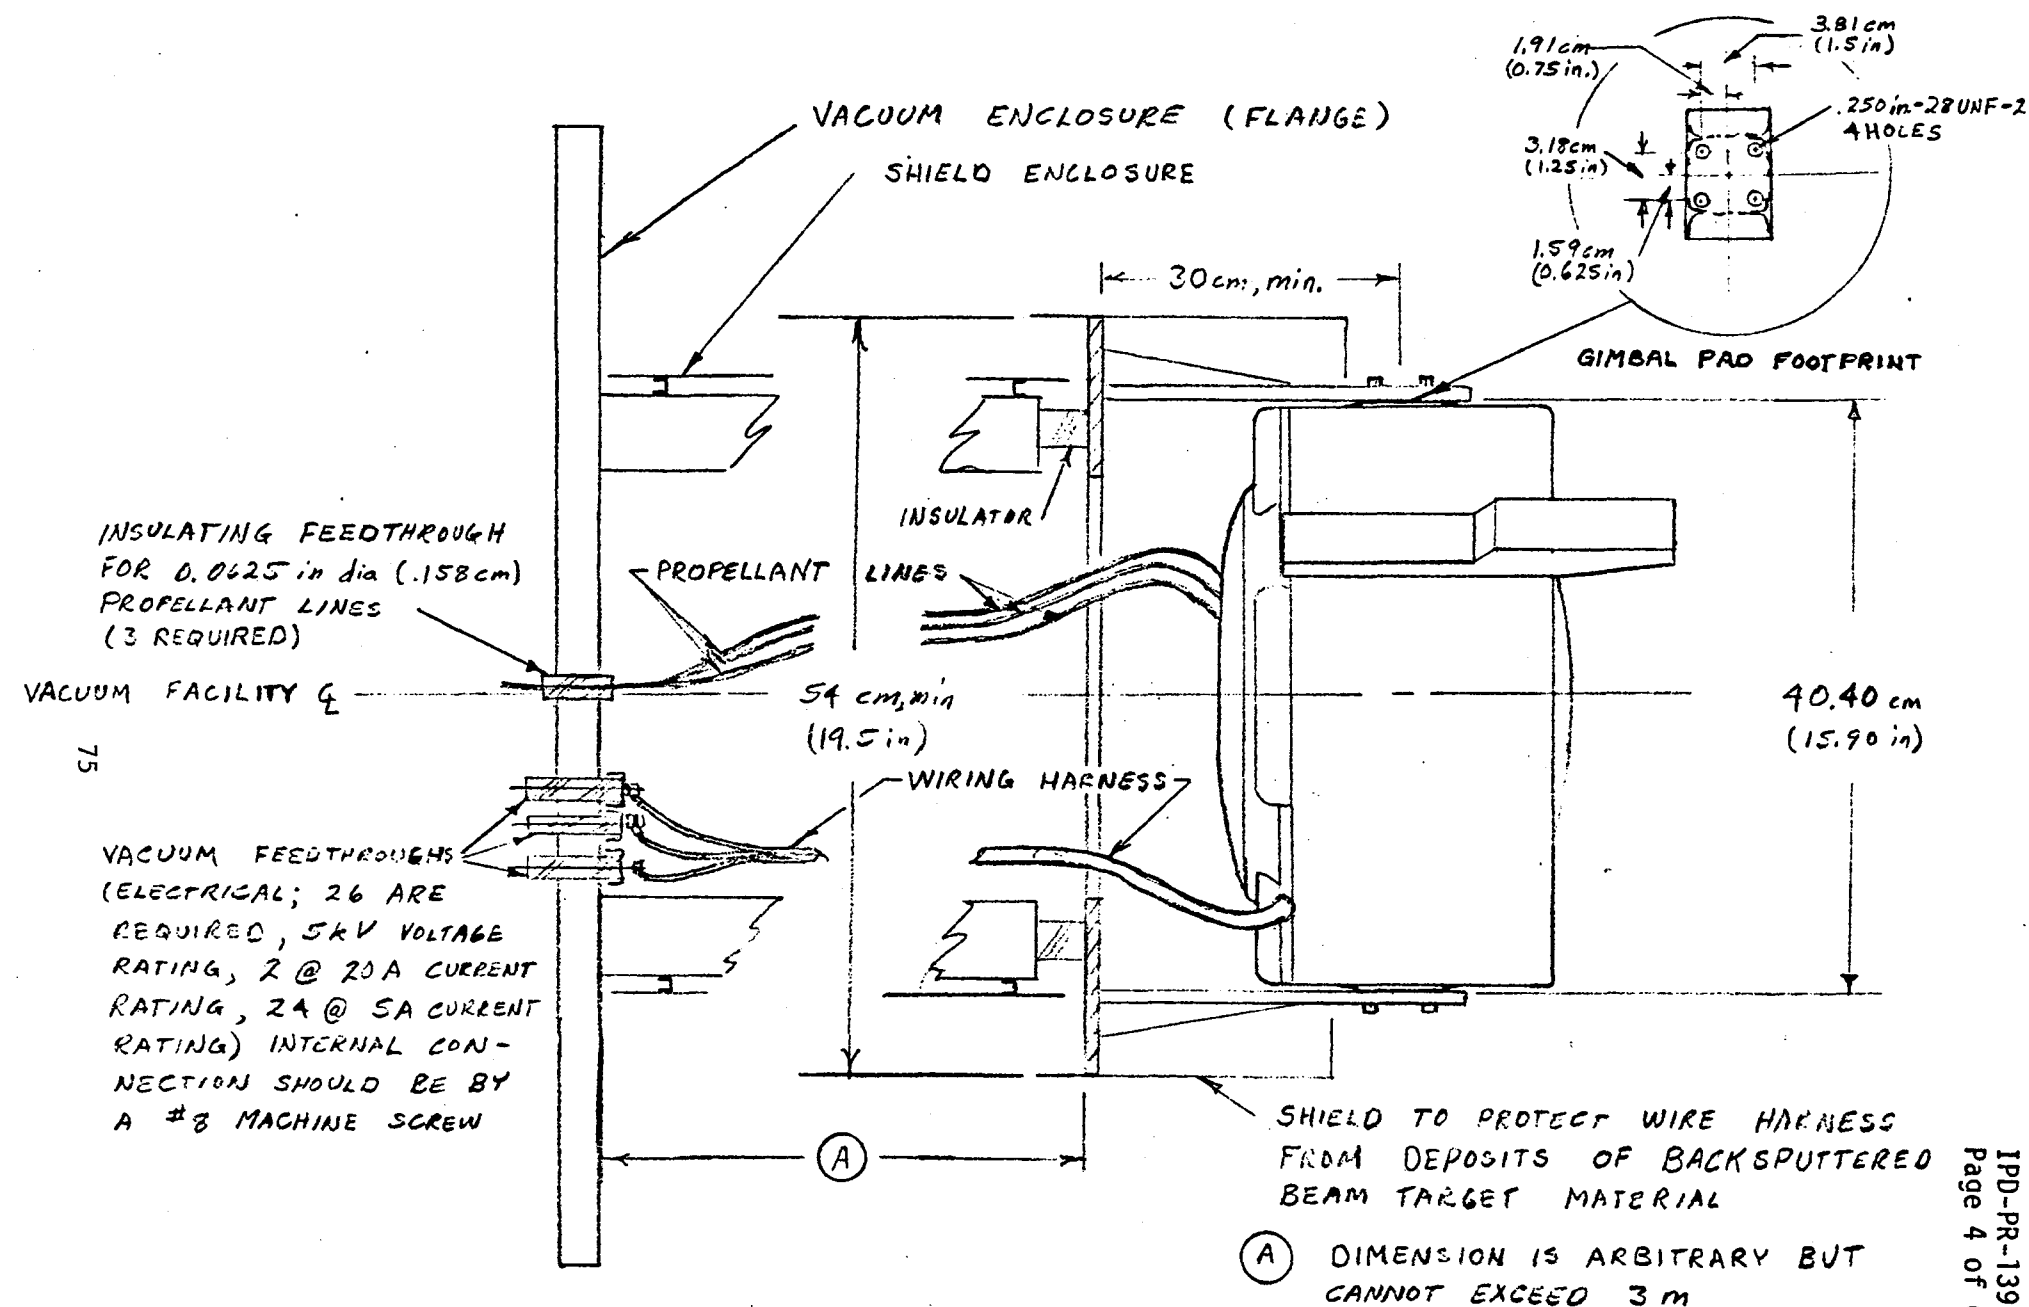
MOUNTING FOR THRUSTER ASSEMBLY FOR INSTALLATION IN VACUUM CHAMBER TEST FACILITY
